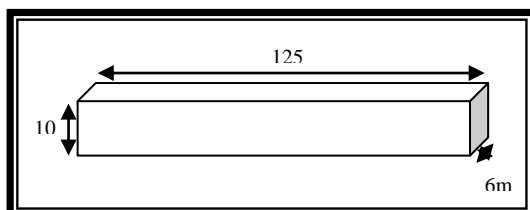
Dimensions of Flexure Test Specimens(in mm) [ASTM-D790-84]
